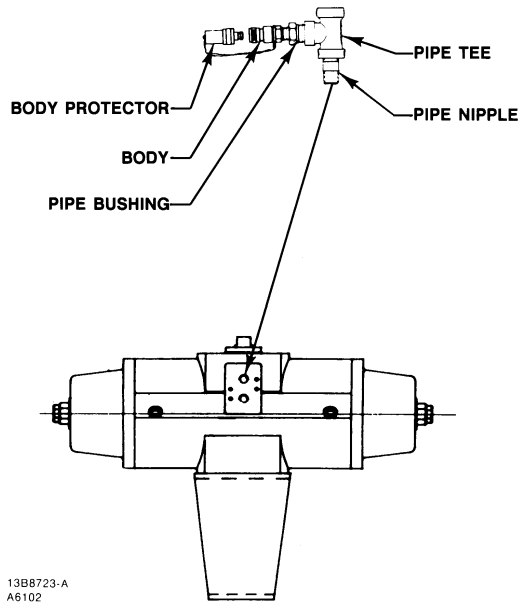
Type 1032 Rack-and-Pinion Rotary Actuator (Spring-Return)
